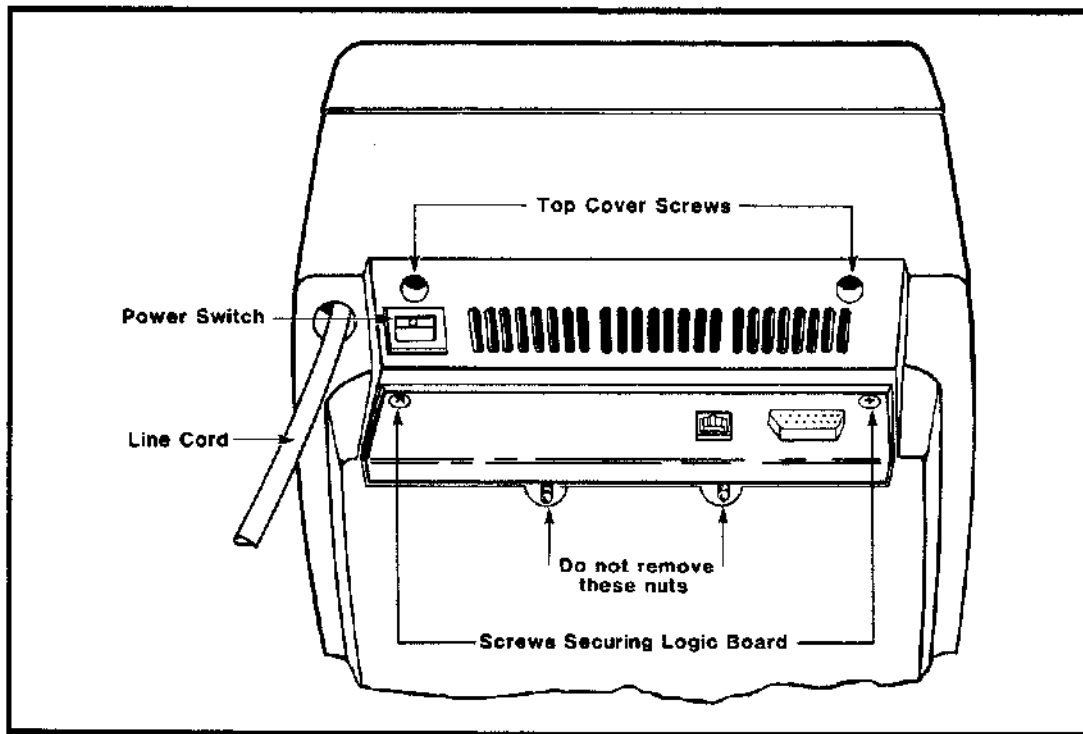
REMOVING THE C-5 TOP COVER SCREWS
